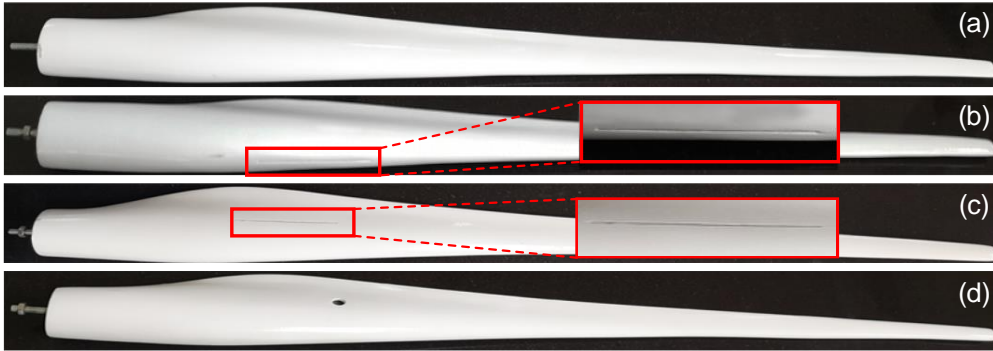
Wind turbine blades used in experiments: (a) healthy blade, (b) damaged blade with an adhesive joint failure, (c) damaged blade with a crack, and (d) damaged blade with a hole.
